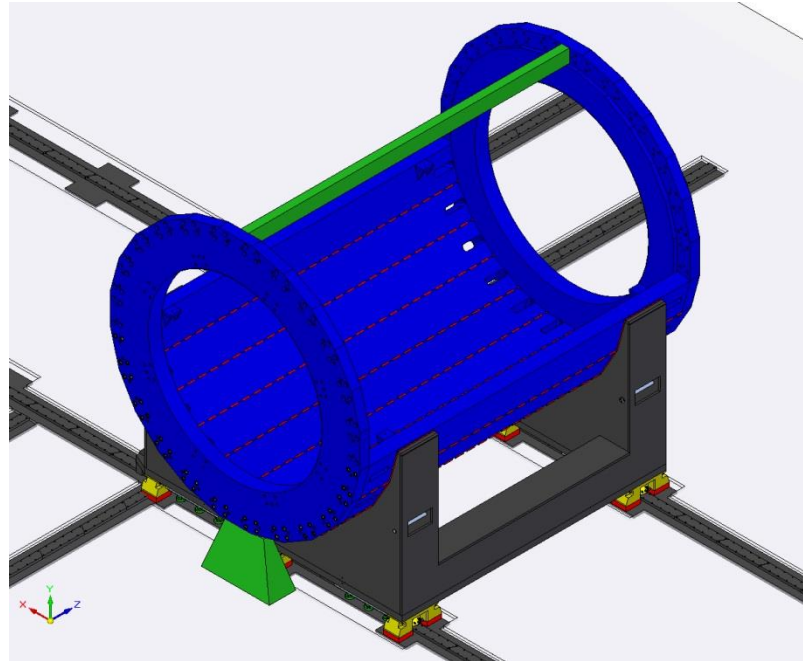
Welding of eleven lower beams to the cradle and to each other (beam welding places are shown by red dashed lines)
